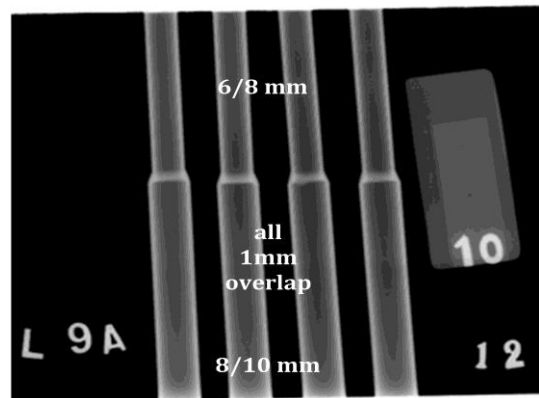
RT Images of 6/8mm # 8/10 mm welded samples
